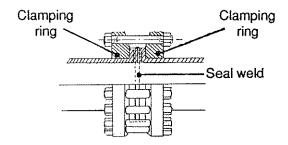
(b) Seal weld with compression ring (the joint can be broken and remade).
